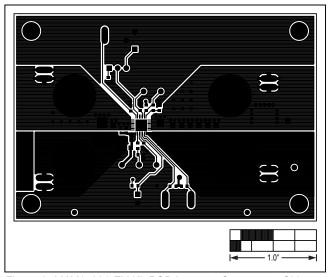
MAX15091 EV Kit PCB Layout—Component Side
